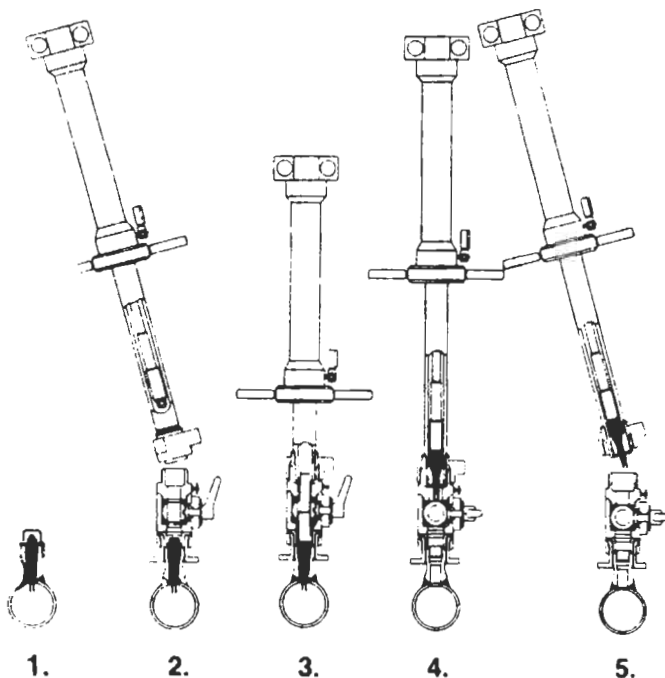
Access fitting and retrieval tool (courtesy Rohrback-Cosasco Systems Ltd.)
